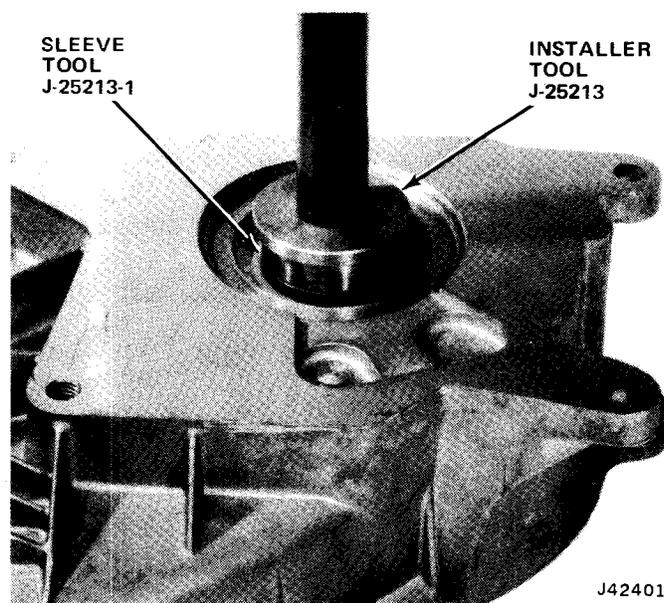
Installing Drive Sprocket Front and Rear Oil Seals
